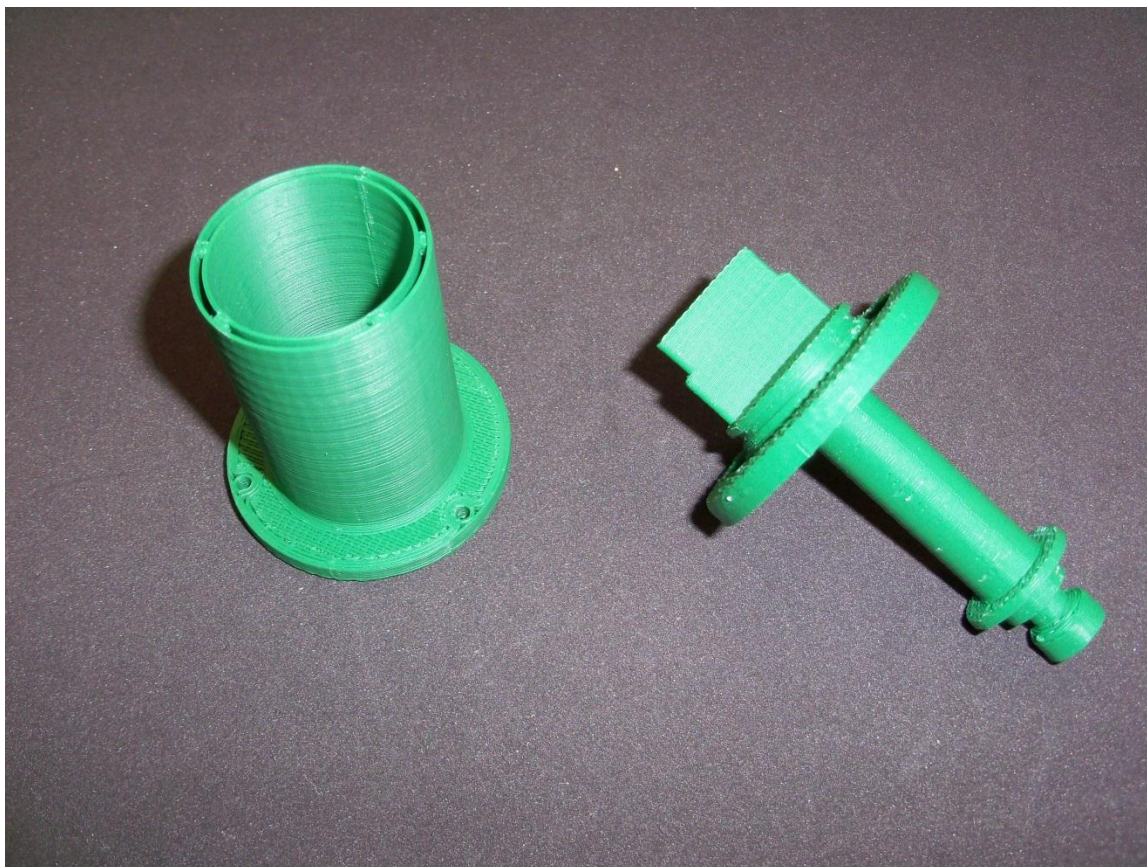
TENSILE TESTING FIXTURE DESIGNED WITH SMALLER SATURATION CHAMBER TO REDUCE THE AMOUNT OF SOLVENT NEEDED. ALL BUT THE CLAMPING FACE COULD BE MILLED ON A LATHE TO REDUCE MACHINING TIME.
